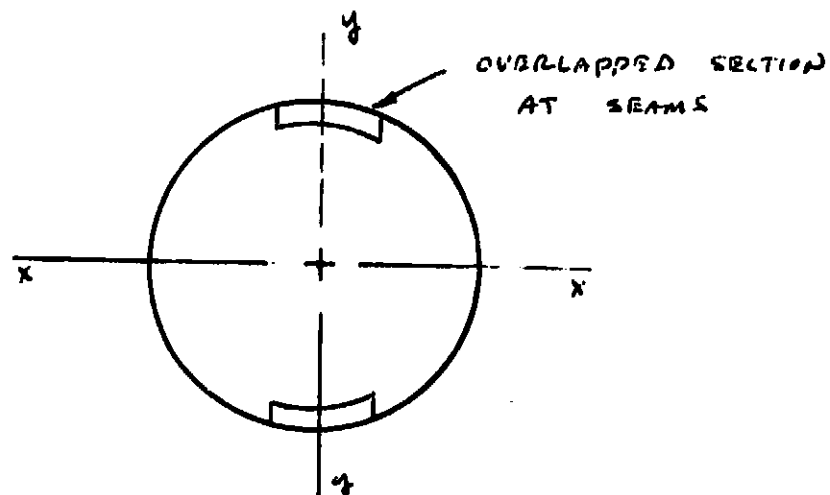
TYPICAL CROSS SECTION OF INFLATION TUBING
